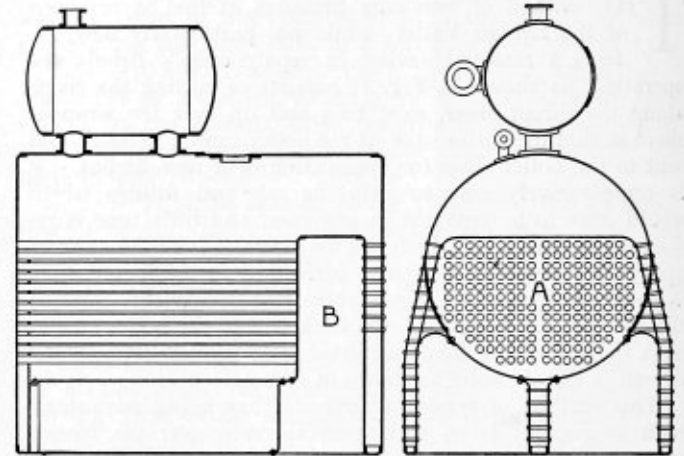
Details of Compact Type Marine Boiler Which Failed
